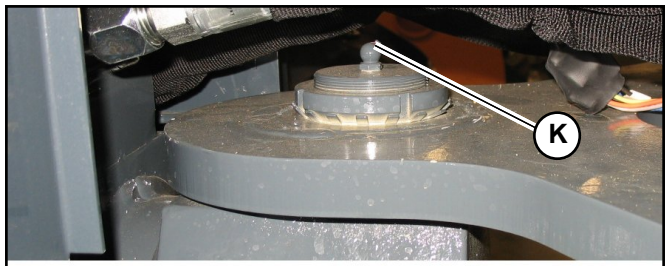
Lubrication - Telescopic Machines - Hitch Pivot Bottom / Hitch Lock Pins
